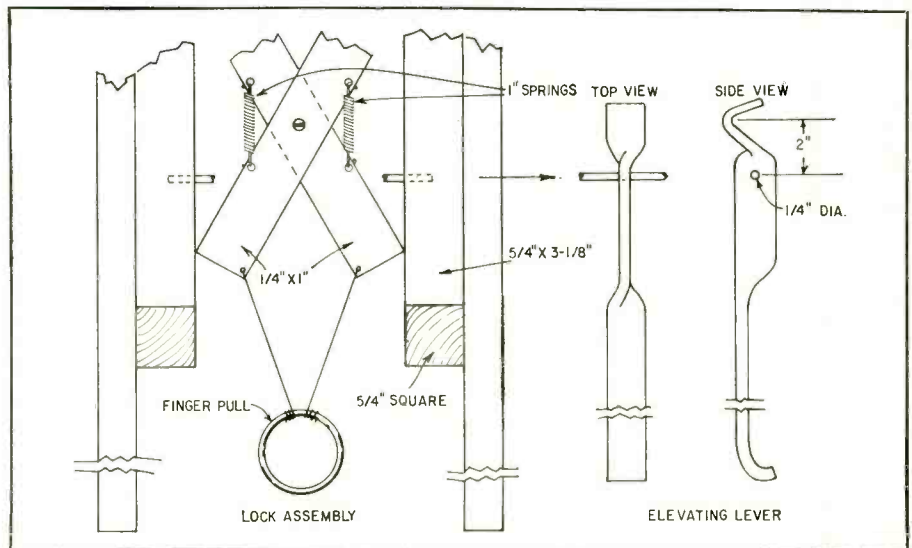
Further construction details showing assembly of lock and elevating lever.
